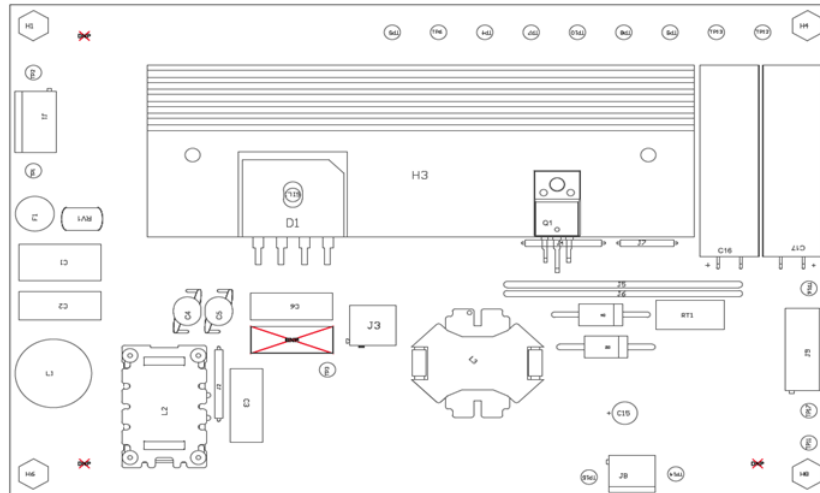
UCC28056BEVM-296 Top Assembly Drawing (Top view)
